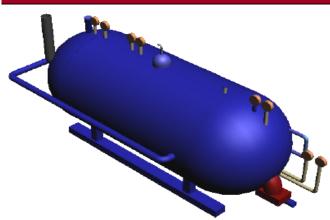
Isometric view of the steam boiler CONCLUSIONS
